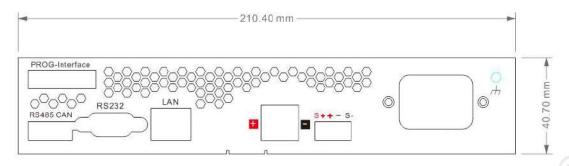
Rear Panel Dimension(mm) (Specification 12A and 8A)
